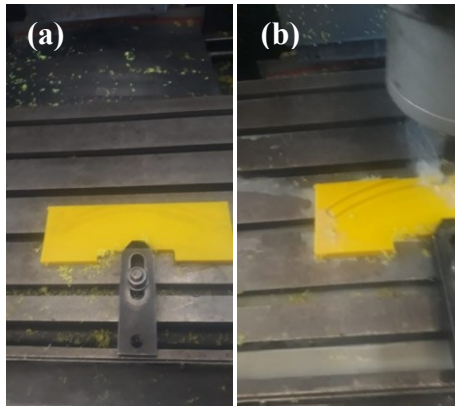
Machining POM cages: (a) securing POM plate, (b) machining POM cage
